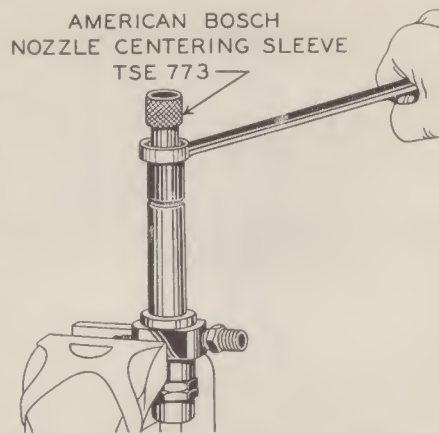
Using a Bosch tool No. TSE773 to center the nozzle tip in the cap nut.
